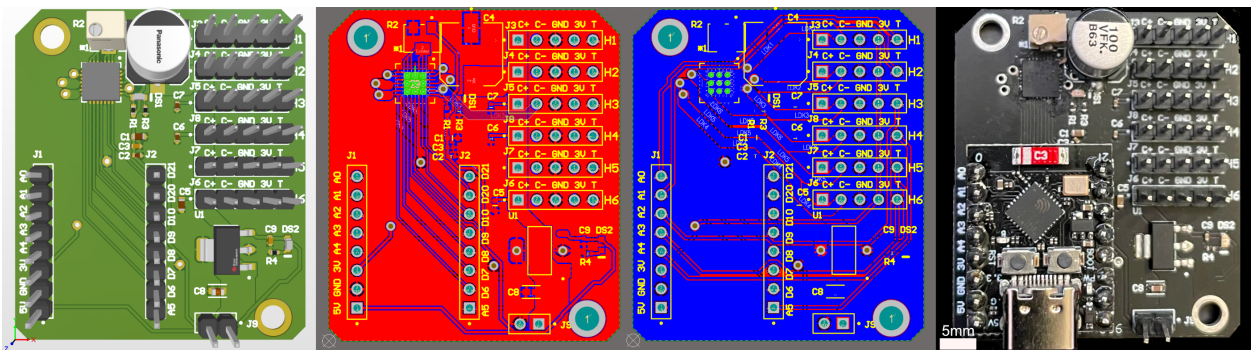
PCB Driver Design. The PCB layout, including 3D render, top and bottom layers, and final PCB, is shown. Due to issues with the ESP32-C3 detailed in the ESP32-C3 errata, we recommend using the ESP32-S3 as a drop-in replacement for the C3.
